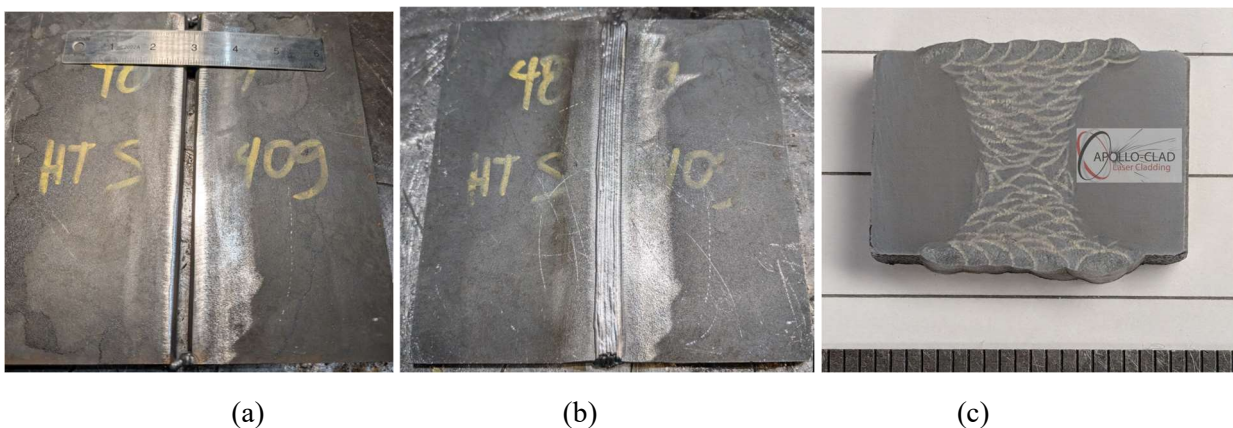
Open root HLBW (a) prior to welding, (b) after welding (c) etched cross section of weld shown in b [courtesy of Apollo Machine, Canada].
